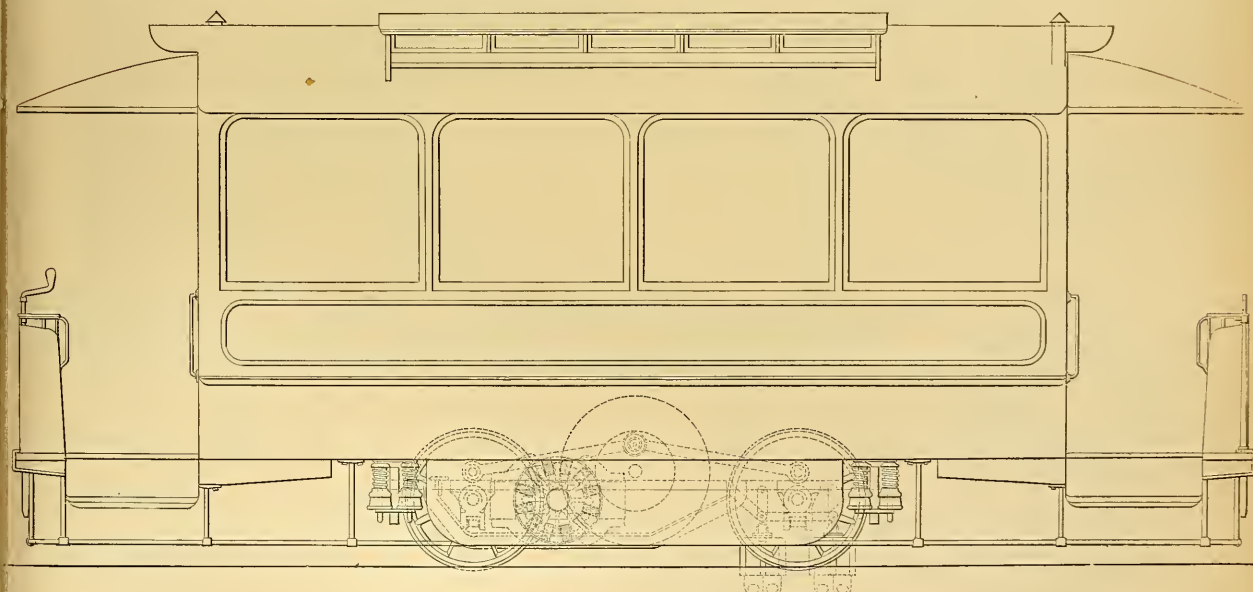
SIDE VIEW OF FULLY EQUIPPED CAR.
